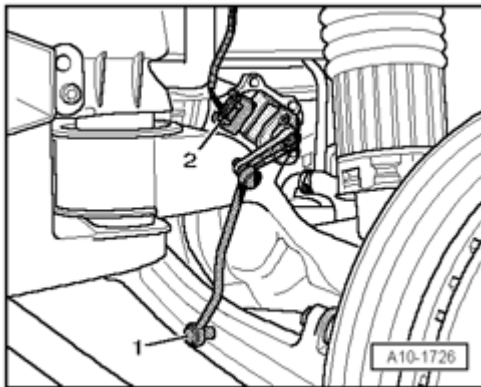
Identifying Left Level Control System Sensor Electrical Harness Connector & Left/Right Control Arms Coupling Rod
